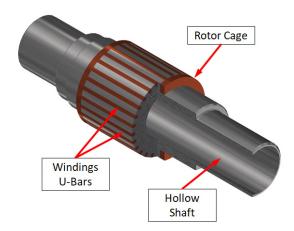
View of Cross-section of Rotor of Torsional Torque Generator
